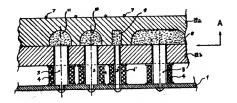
shows a sensor assembly affixed to the back of a dartboard.
